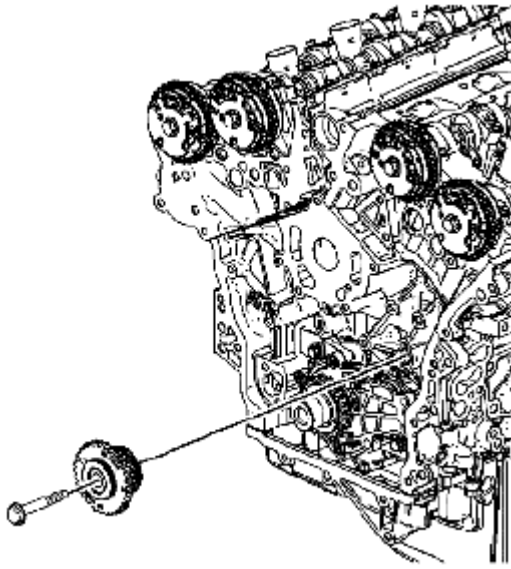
Identifying Left Camshaft Intermediate Drive Chain Idler And Bolt
